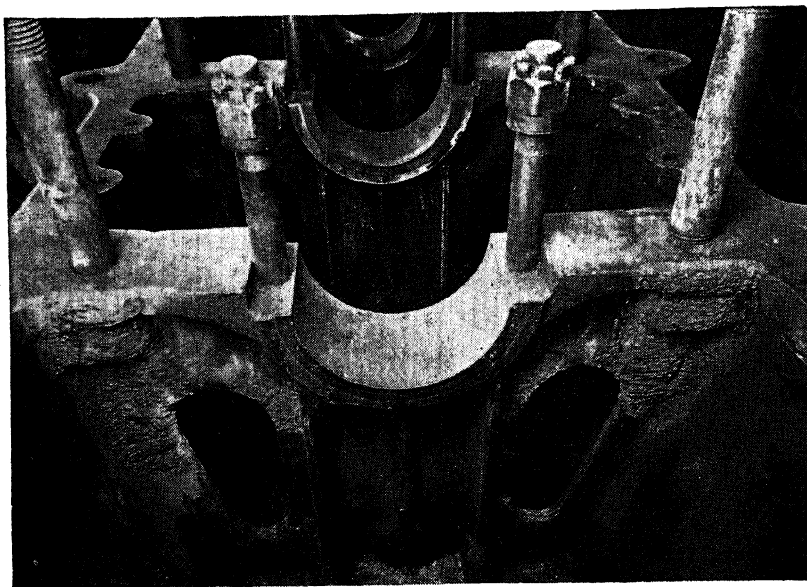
Close-up of weld repair in base of Diesel engine. Crack was vee'd out and studded. First layer was welded with cast iron type electrode. Subsequent layers made with mild steel electrode. Welded from both sides.
